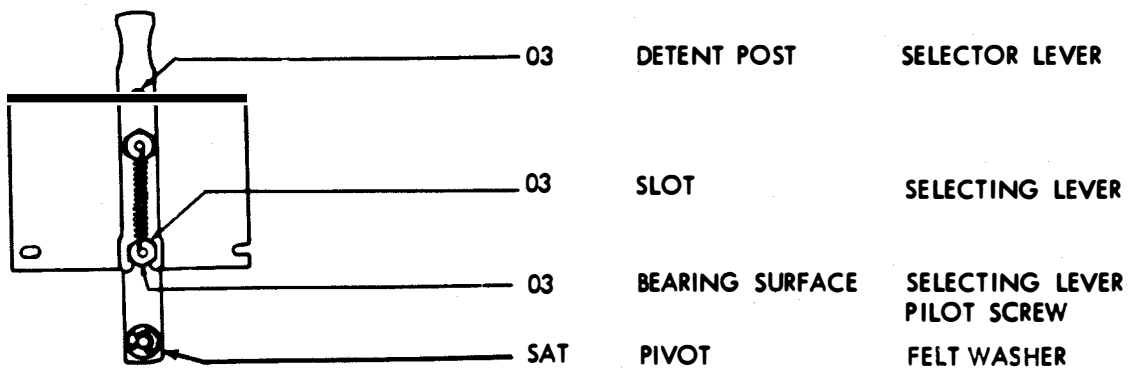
Variable Speed Drive Mechanism, Left Side View
